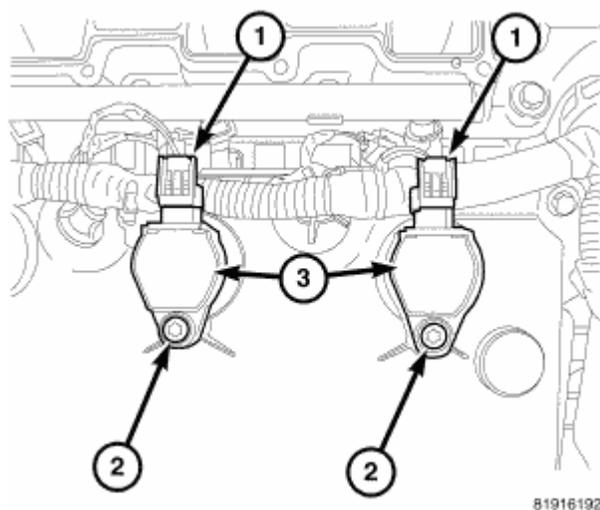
Identifying Ignition Coil Electrical Connector, Coil Mounting Bolt & Ignition Coils
